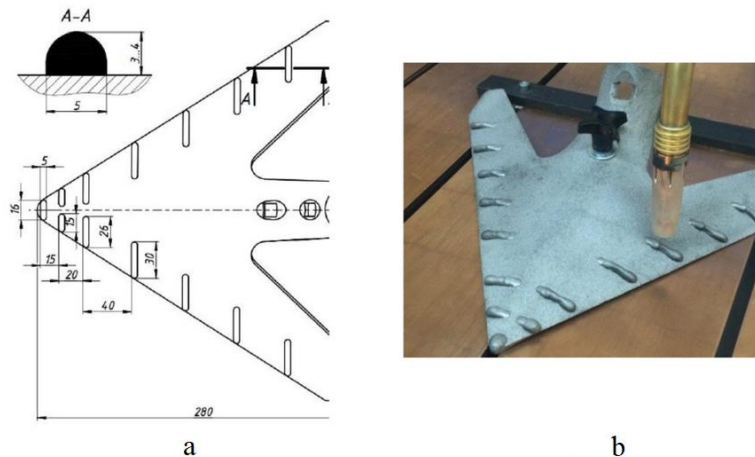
Scheme of wear-resistance rollers location (a) and deposit welded V-shaped sweep of the cultivator [3, 4]
